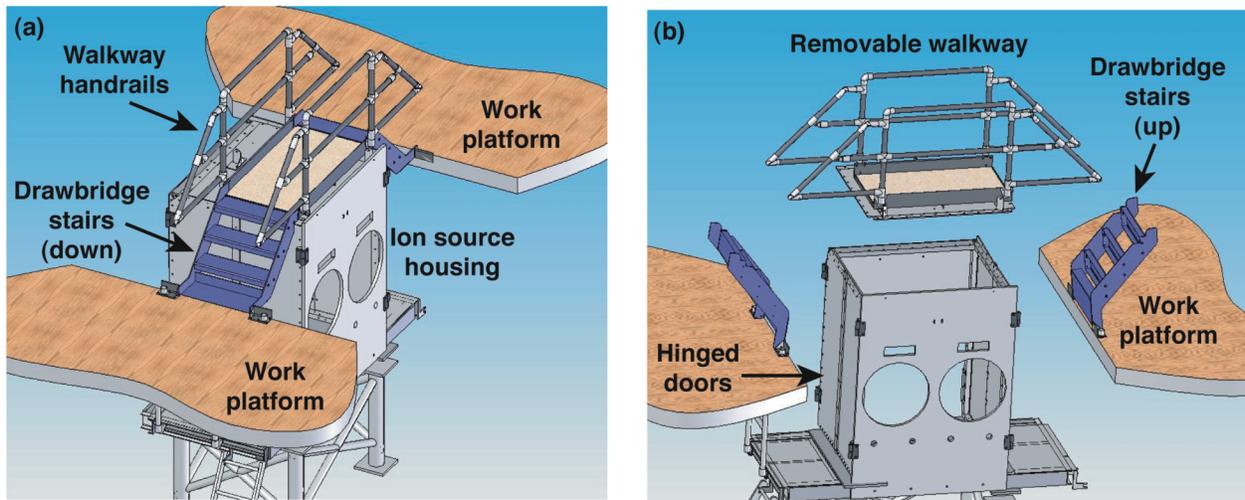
(a) Modified ion source housing crossover allows access to all areas around perimeter of torus hall. (b) Ion source maintenance or extraction is enabled using removable ceiling (and walkway), drawbridge stairs, and hinged side doors.
